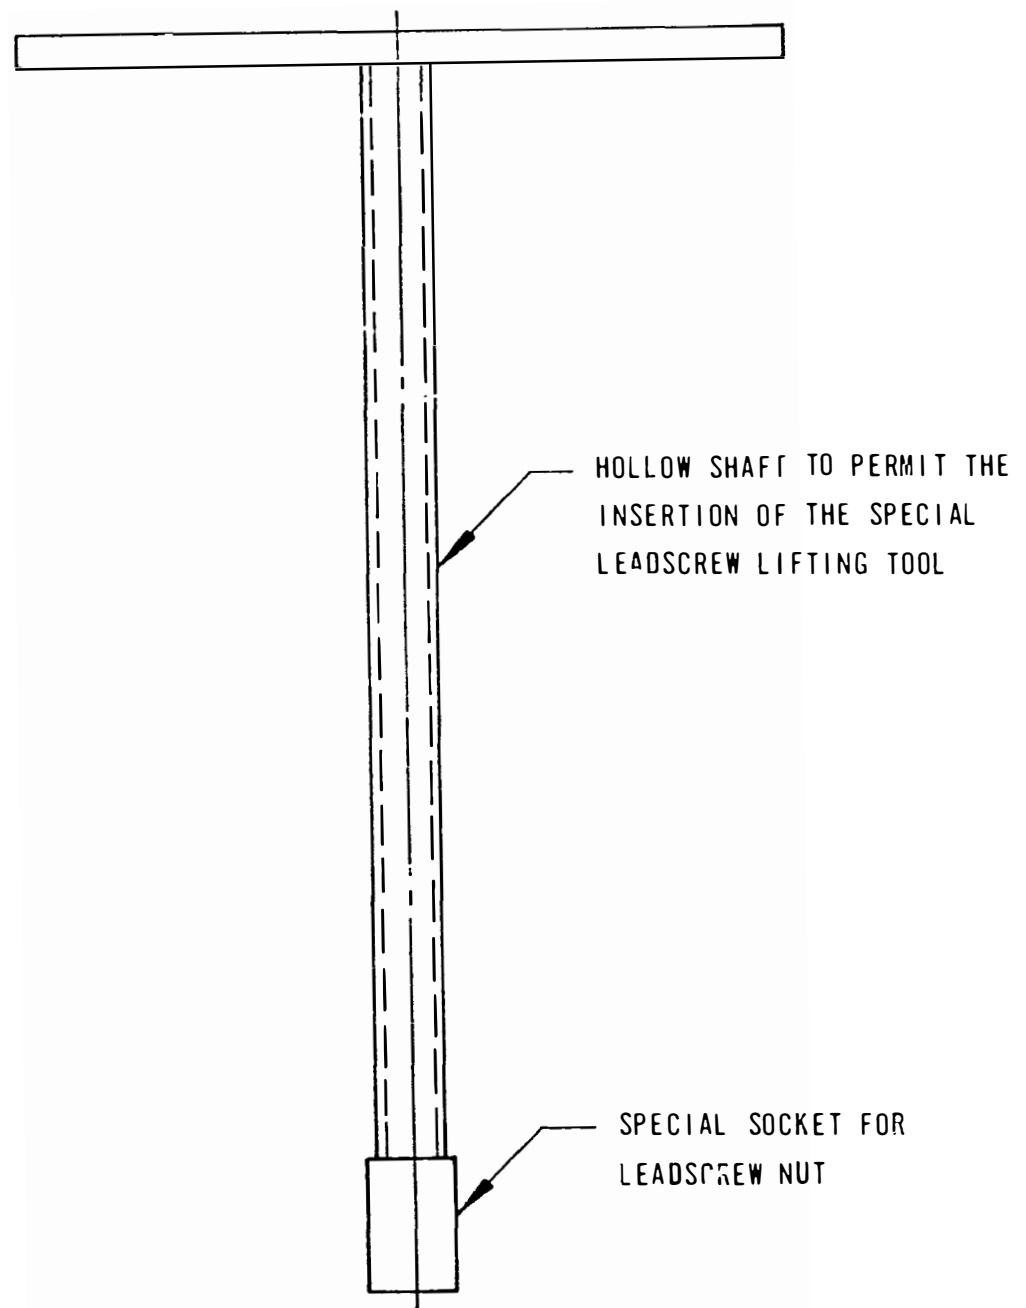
SPECIAL LEADSCREW NUT TOOL
